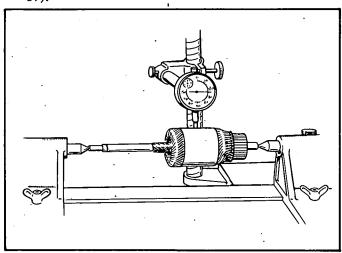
CHECKING ARMATURE SHAFT RUNOUT
